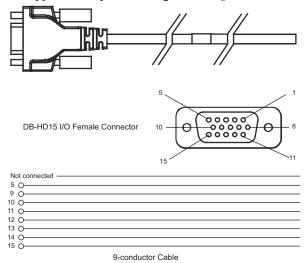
I/O DB-HD15 Strobe Port Cable Table 22: I/O Strobe Port Cable Wiring
